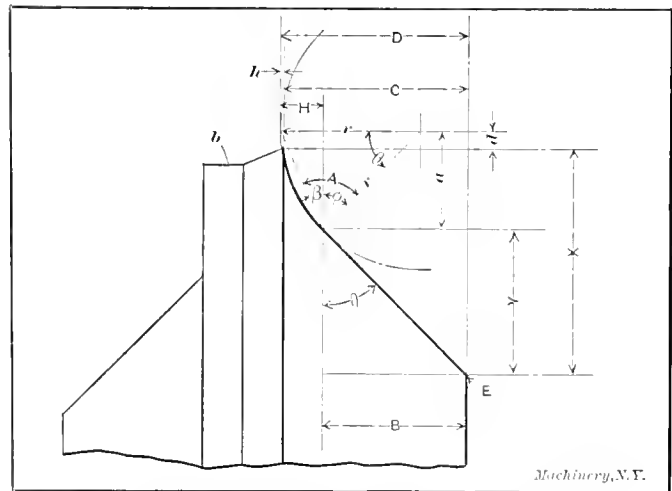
Diagram for Determining Dimensions of Circular Cut-off Tool which forms Part of a Spherical Screw Head
